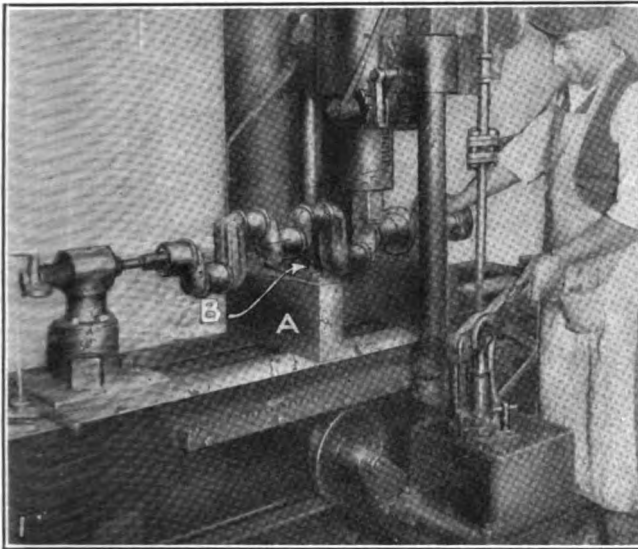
STRAIGHTENING A CRANKSHAFT FORGING. FIG. 2. SPRINGING IT SIDEWAYS
